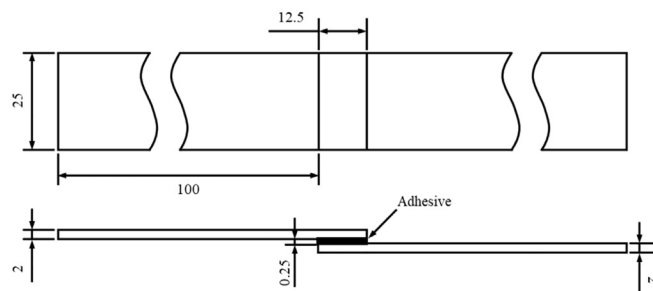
Illustration of lap-shear joint dimensions (unit in mm).
